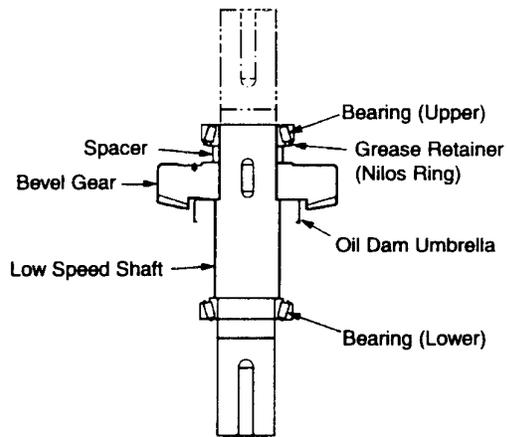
LOW SPEED (BEVEL GEAR) SHAFT ASSEMBLY
